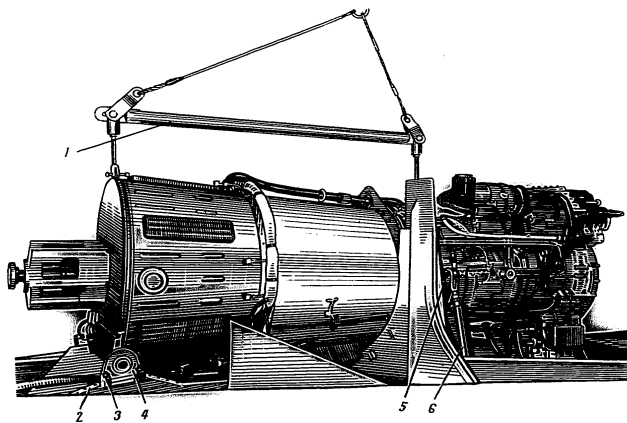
INSTALLATION OF J-25B ENGINE IN FUSELAGE
